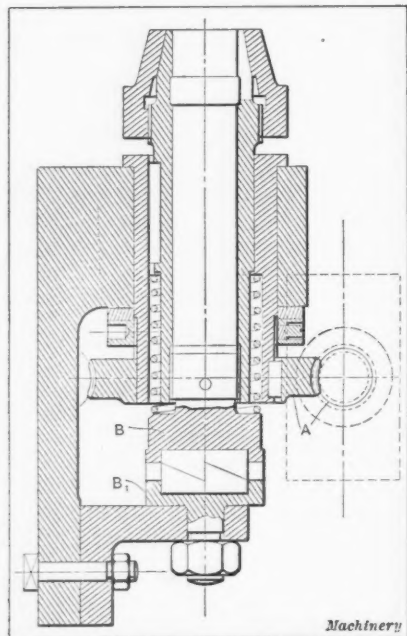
Vertical Section of Fixture shown in Fig. 1
